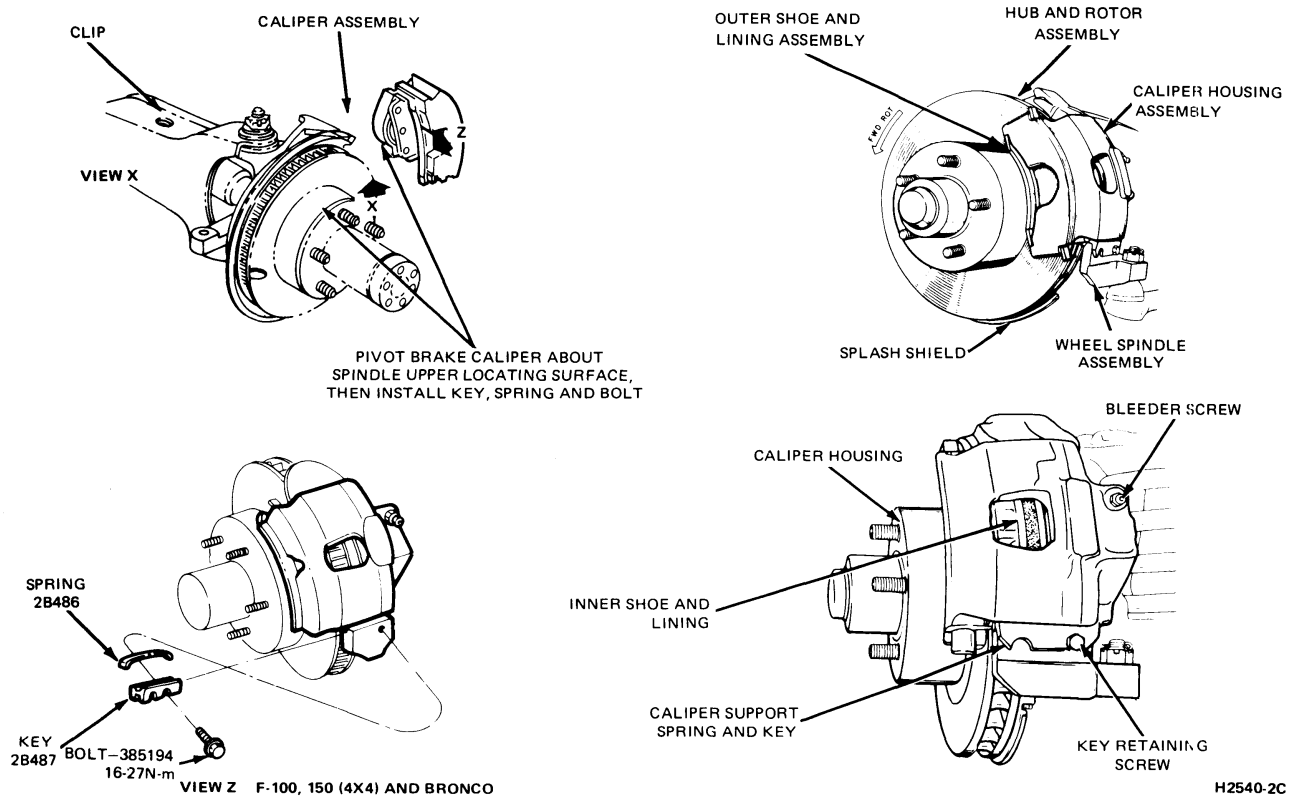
Disc Brake System—F-150, (4x4) and Bronco
